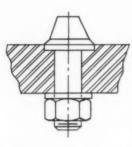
Shank end of this headed type core is threaded and retained by a nut. Core is semi-self-cleaning because flash can go only to predetermined depth.
